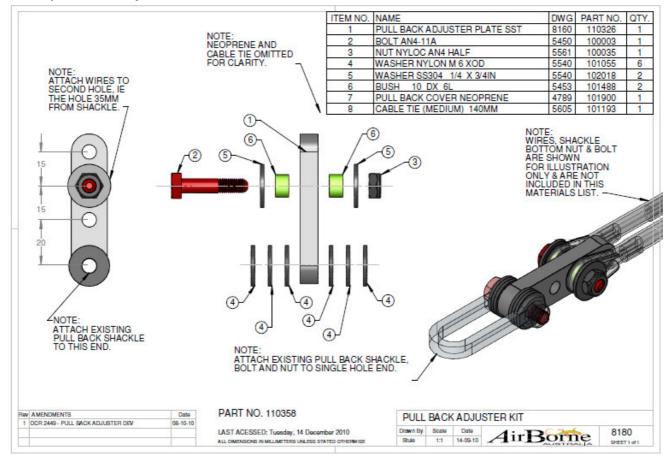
Drawing A4-8180 – PULL BACK ADJUSTER KIT.
